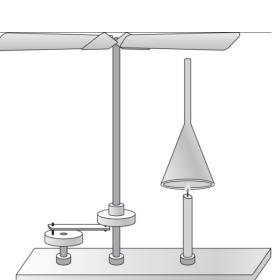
Concept V of machine shop kit: The hot air is channeled, which causes the propeller to rotate, which spins a flywheel. The flywheel is connected to a second flywheel by a connector link. Therefore, as the first flywheel turns, the second flywheel will also turn.
